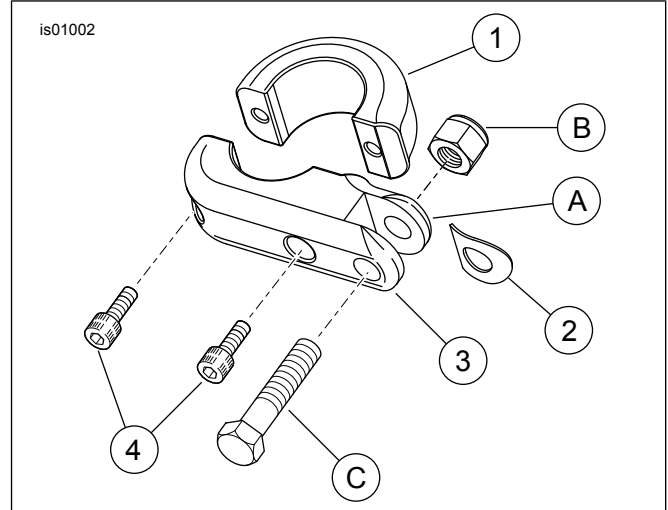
Service Parts: Engine-Guard Footpeg Billet Mounting Kit
